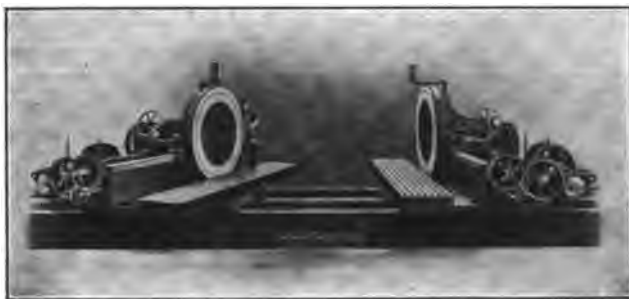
u*.—Rotary Planer, Niles-Bement-Pond Co., New York.
